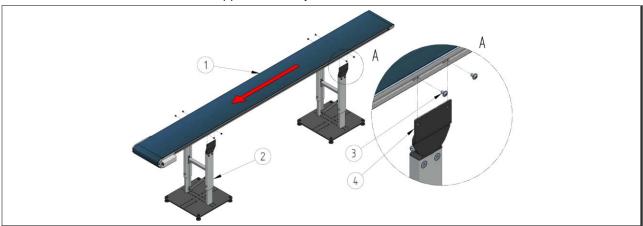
Assembly, conveyor with support BE 010 – BM 010 (typical)
